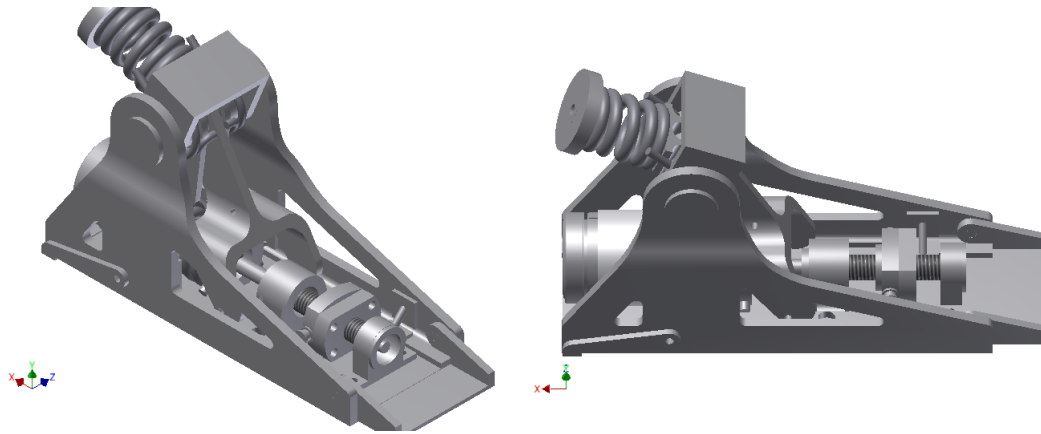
The prosthesis' arrangement at MDF. The leg is at  $10^\circ$  and the small lever arm rotated over  $15^\circ$ , compressing the spring positioned at the back of the prosthesis. The ball screw nut is still compressing the spring positioned over the motor axis.
